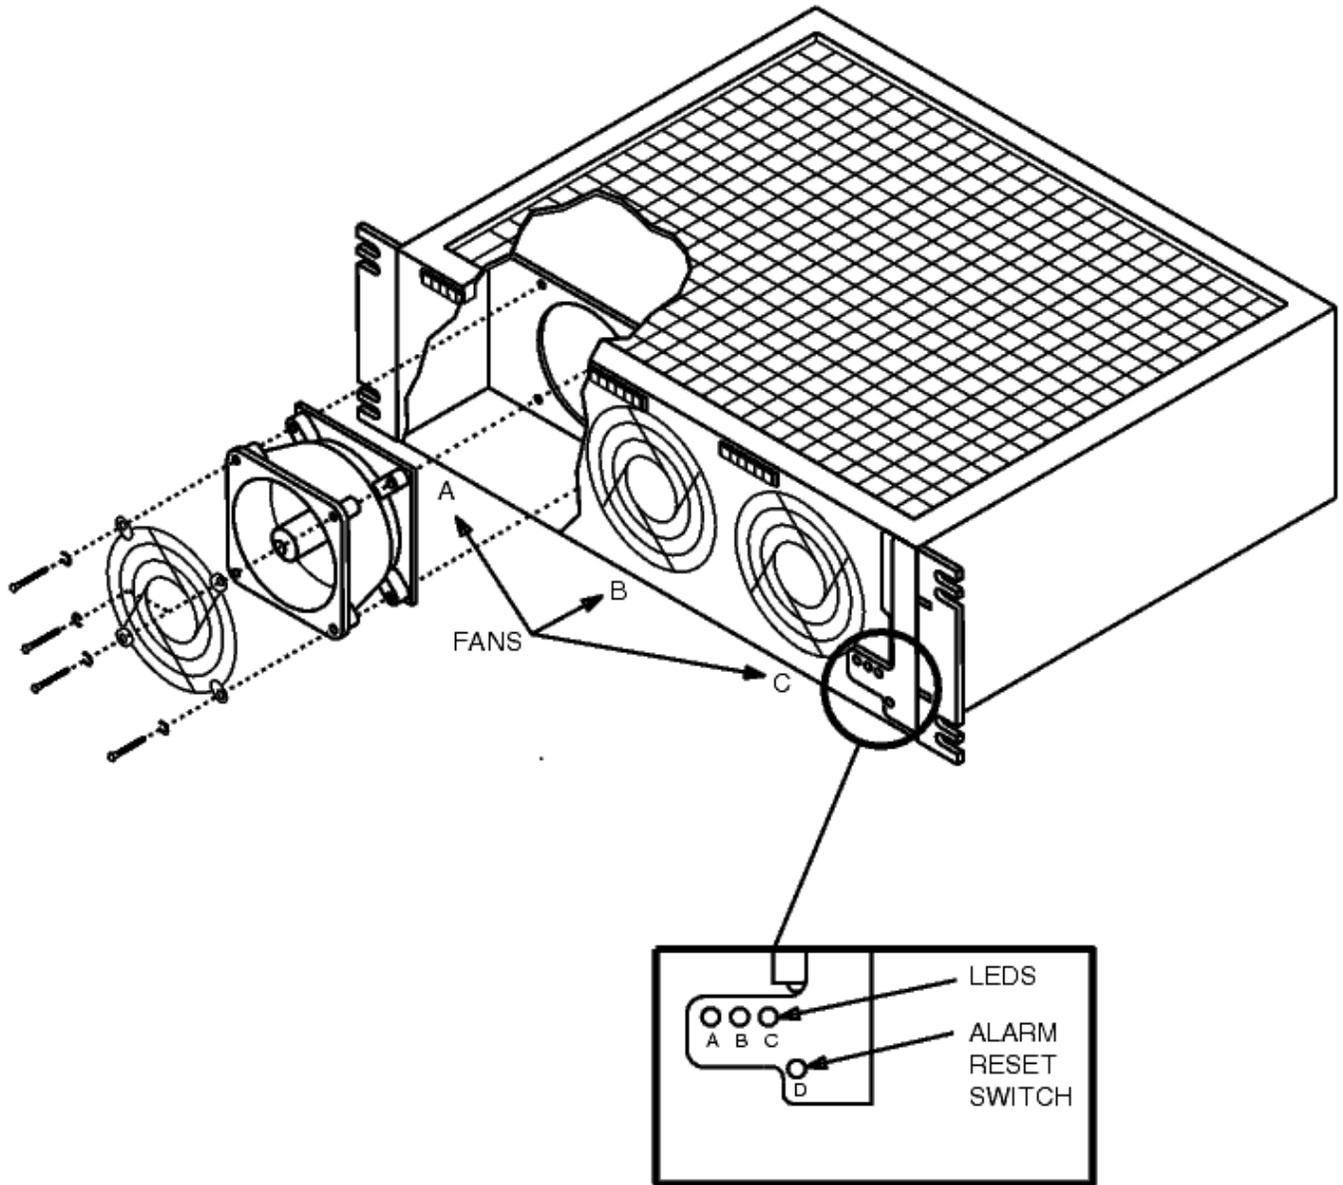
Fan Assembly (3 Fans) - J5D003BE-X (1-2)
